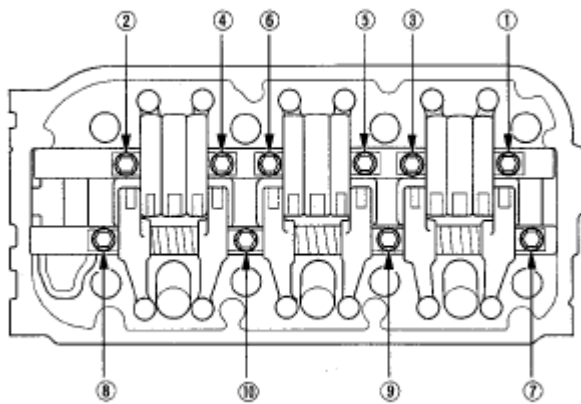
Identifying Rocker Shaft Mounting Bolts Loosening Sequence
